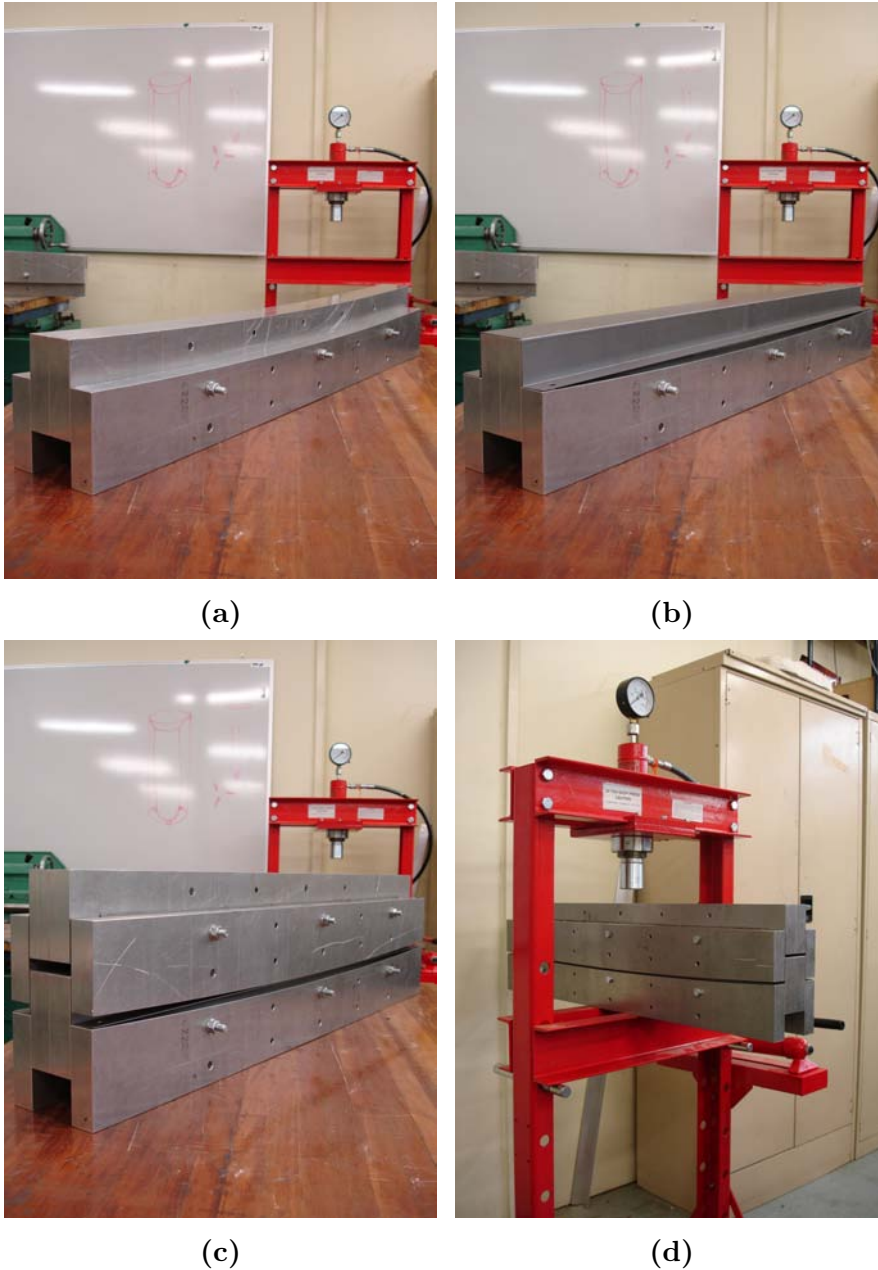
Images show the lower bending tool (a), the folded and laser cut channel (b), the upper bending tool (c), and the hydraulic press (d).
